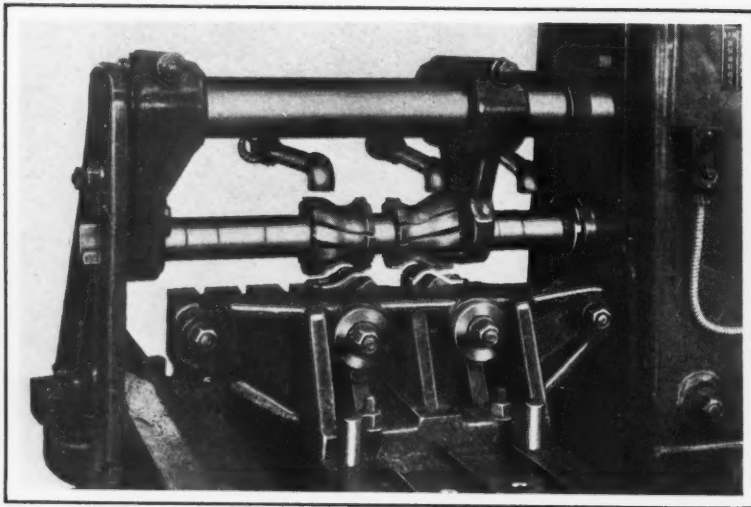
Form-milling the Crankpin End of Two Master Rods
